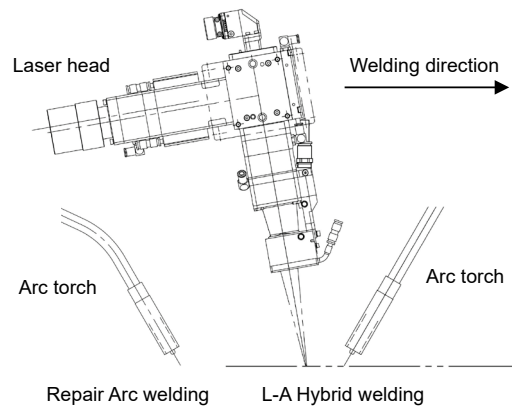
Schematic illustration of arrangement of laser-arc hybrid welding system that can consistently perform repair of reinforcement by arc welding.
